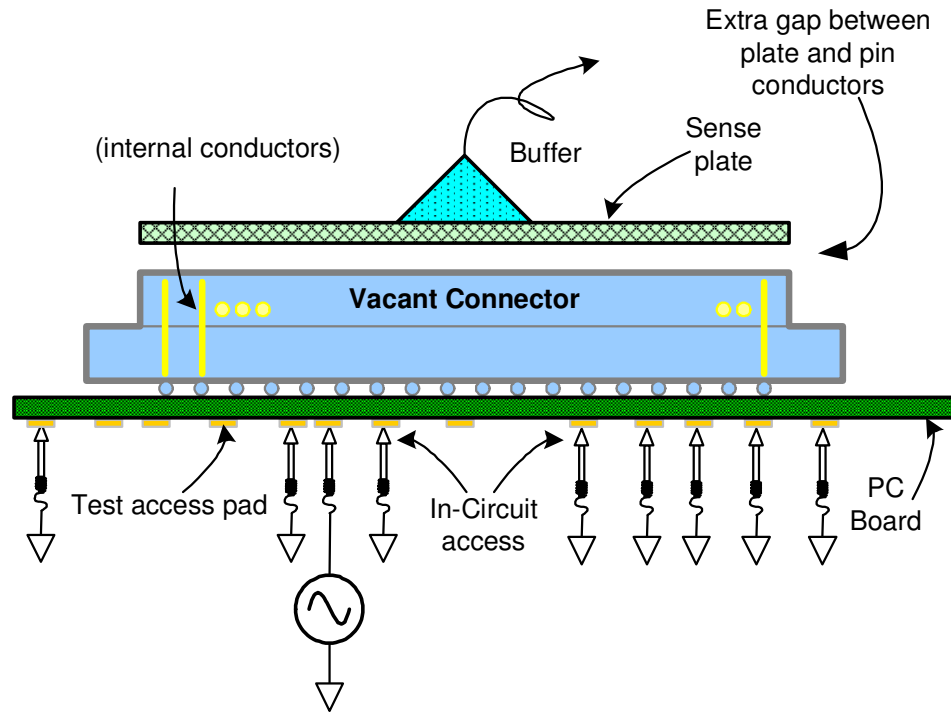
2 Testjet with mechanical “shift” on the sense plate [Courtesy of K. Parker, Agilent Technologies]
